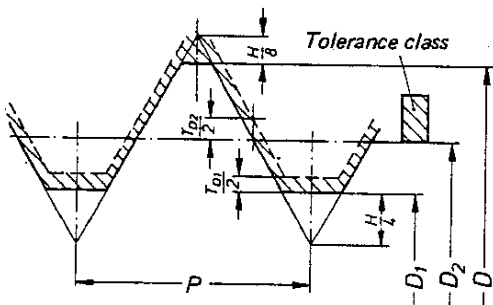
Nut thread with fundamental deviation 0 (tolerance position H)
